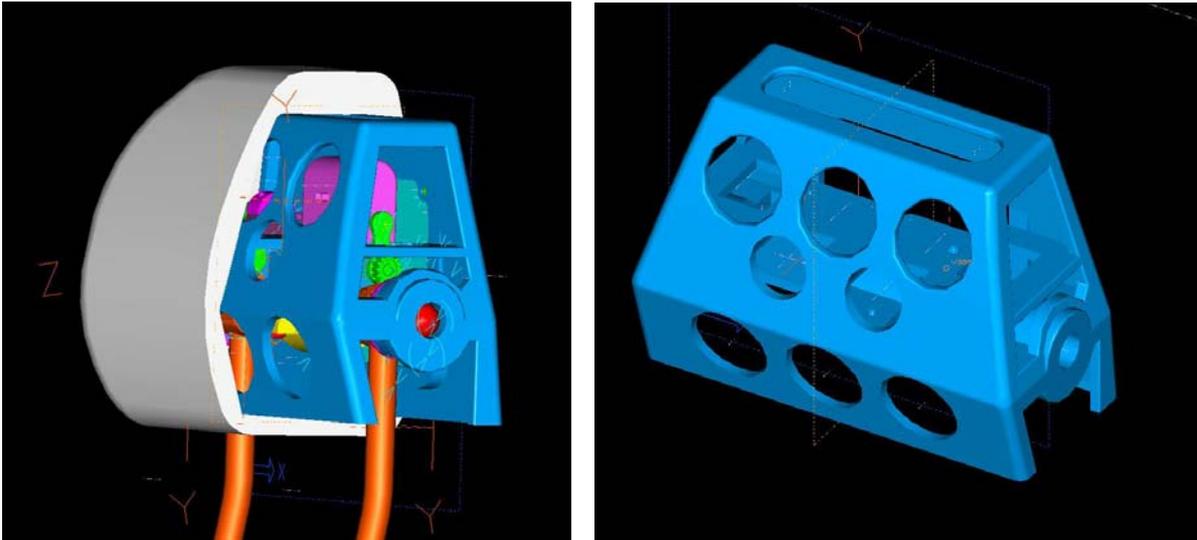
Dimensional layout – headrest detail (left), headrest shell made of composites (right)
